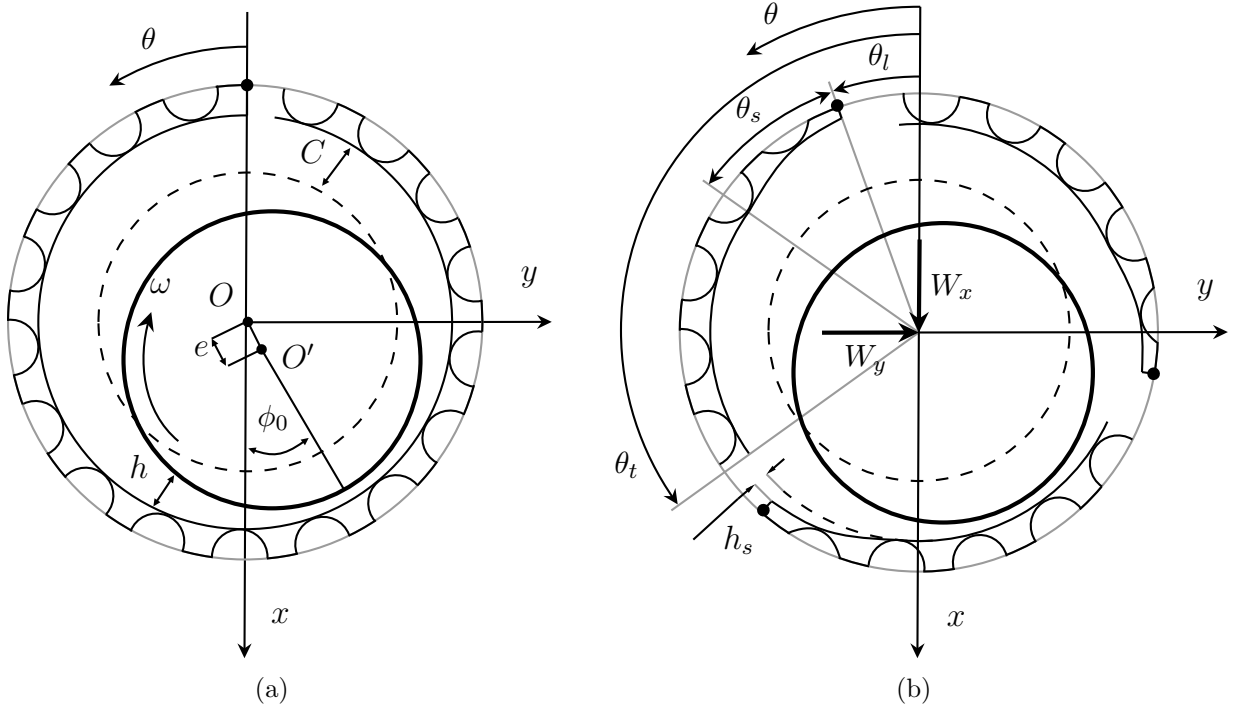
Detailed view geometry of the rigid rotor supported by foil bearing:
